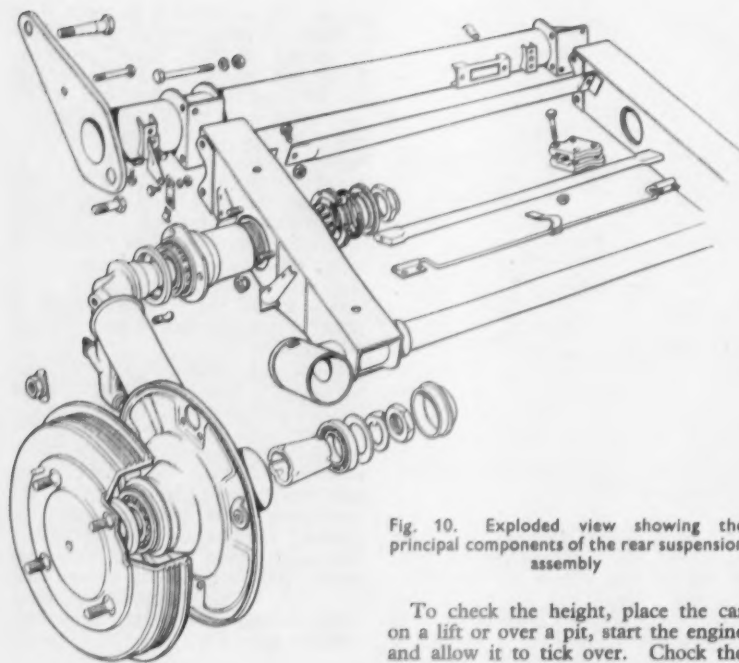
Exploded view showing the principal components of the rear suspension assembly
